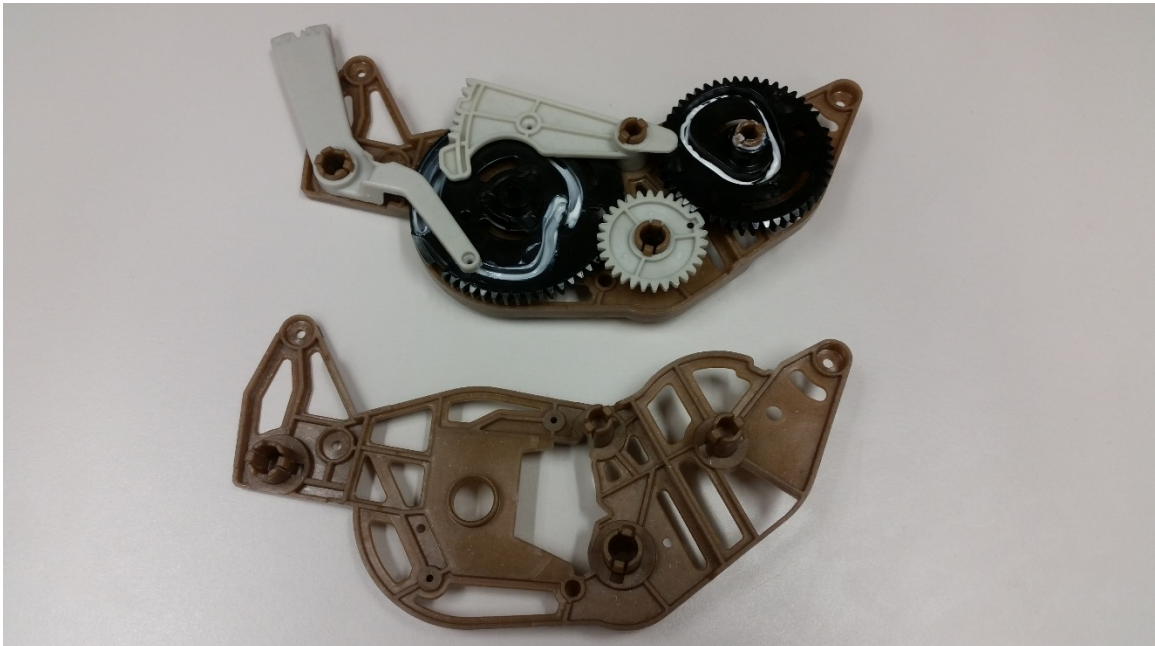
Photograph of PP/AF-B 90:10 (%wt) injection molded HVAC component (bottom), assembled AF/PP component with gears and CAMs (above).
